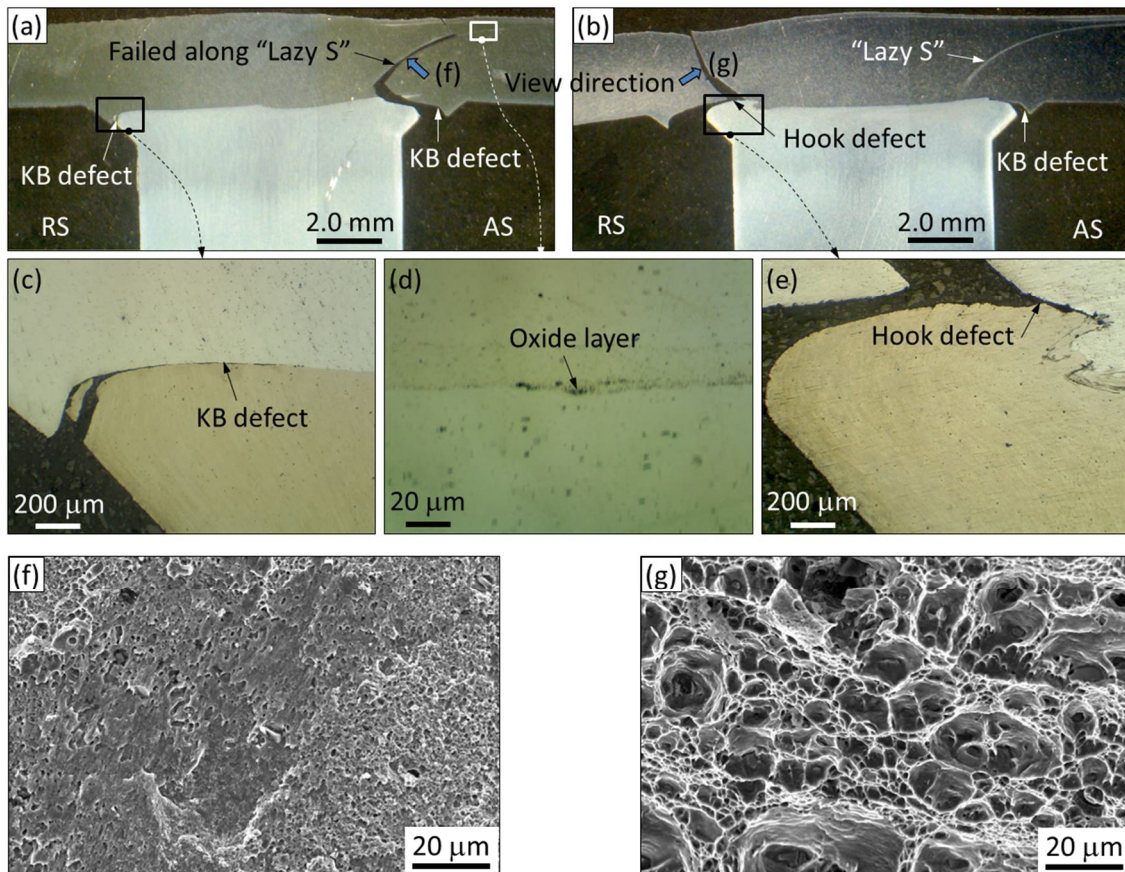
Two types of fracture: (a) Cracked “Lazy S”, (b) cracked at hook defects, (c-e) microstructure at KBs, hook defects and “Lazy S”, and (f,g) fracture surface of FT1 and FT2, respectively.
